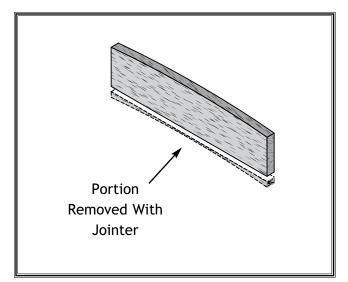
Edge jointing straightens the concave edge of the workpiece.
